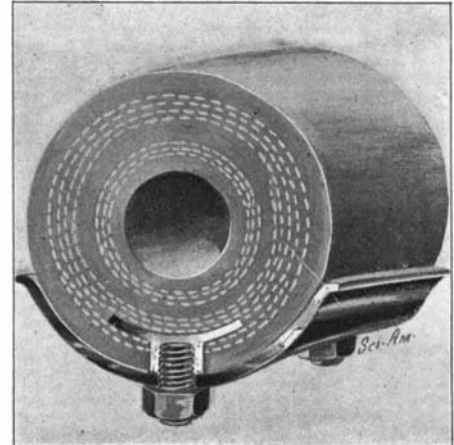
Single-Tube Tire, Showing Method of Attachment.
